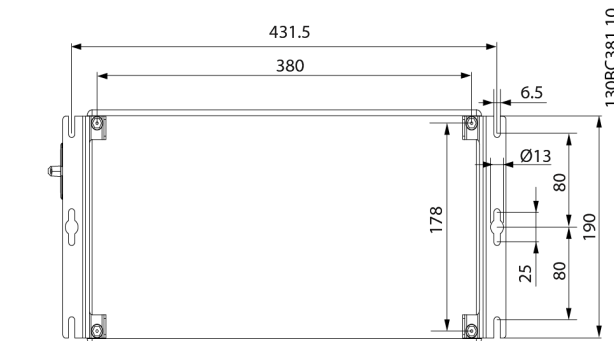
Cable Entries and Hole Sizes (Large Unit)
